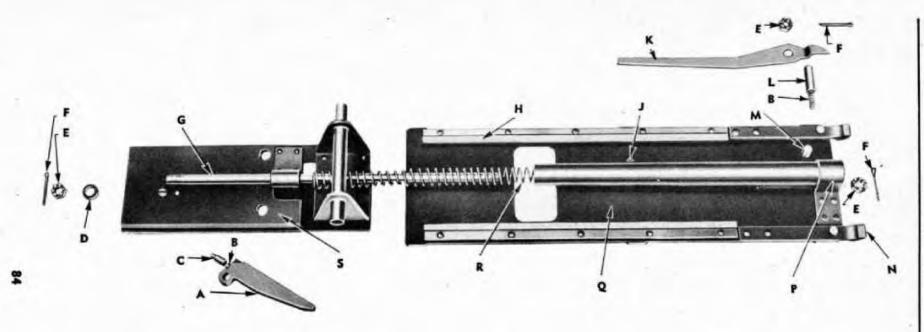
Loading Handle Cam and Base Assembly (Gun AN-M4)
